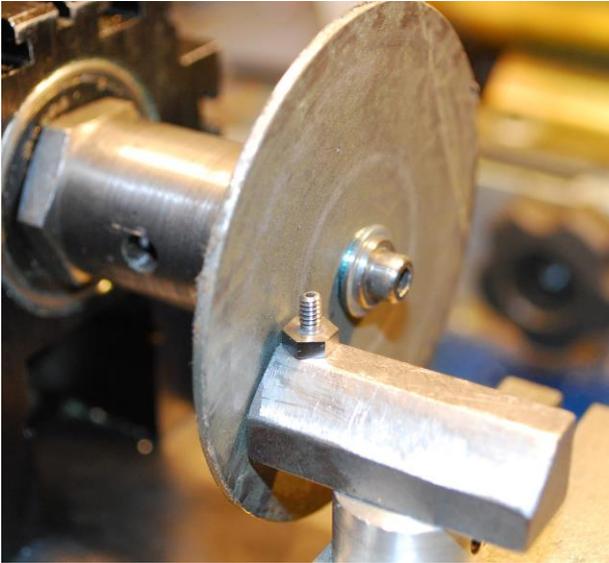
A disk with 400-grit sandpaper is mounted in the lathe for polishing the hex head of the intermediate arbor. A steady rest holds the part at center height while the part is applied to the wheel by hand.
